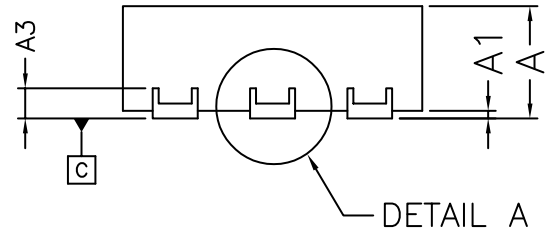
DFN 2 x 2 x 0.75 package drawing: side views
